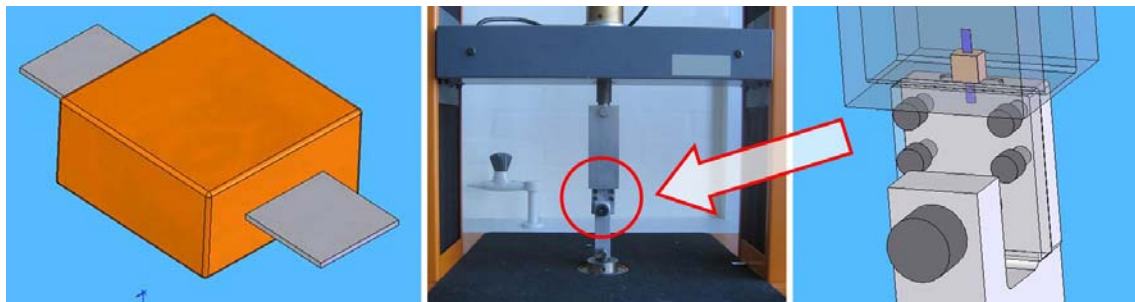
Schematic view of the hybrid (metal and polymer) demonstrator (left), pull test machine (middle), device for holding the polymer matrix and to clamp the metal insert (right) [Tosello, 2006(1)].
